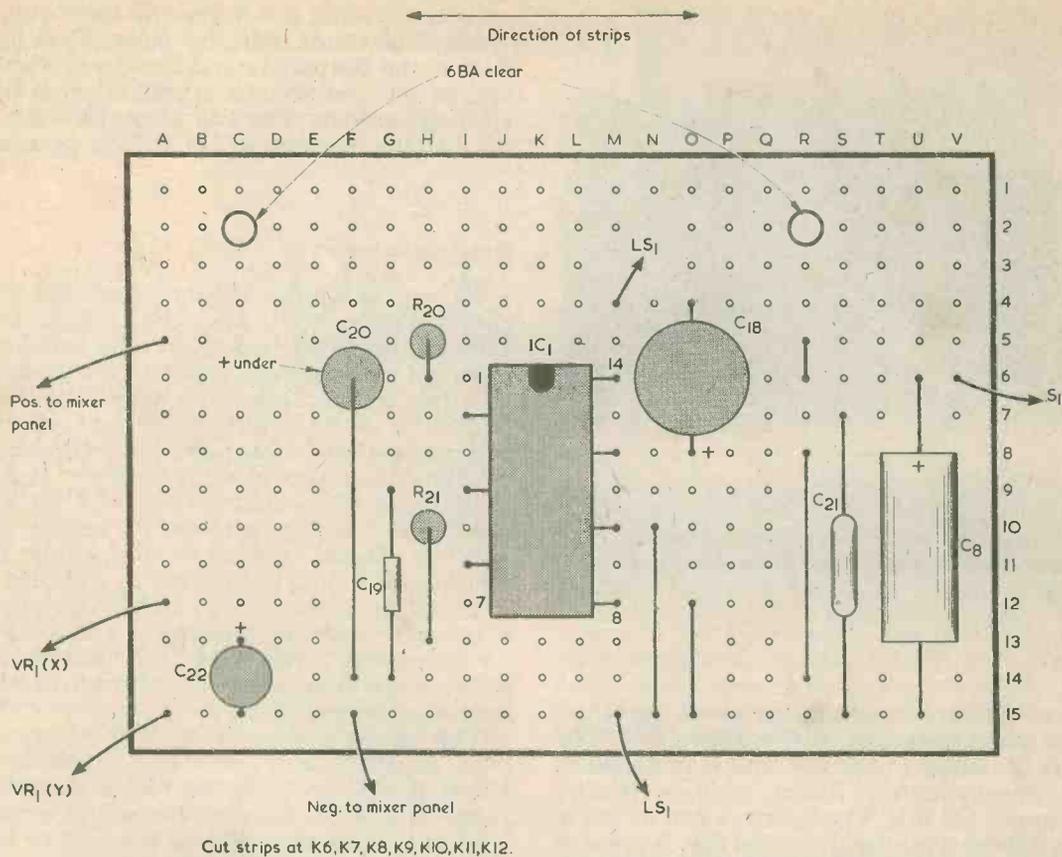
The a.f. amplifier components are wired up on the Veroboard panel shown here. This is then bolted to the top right corner of the main board
